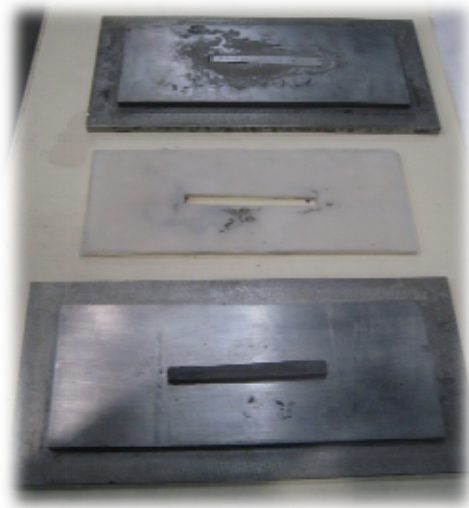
MOULD USED TO PRODUCE THREE POINT BEND SPECIMENS
